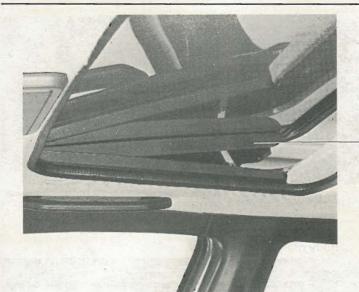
Remove the sunroof side trim mouldings (Sec 29)
